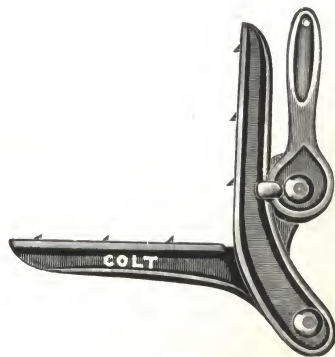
Fig. A. Aluminum Head, for holding wood strips to protect finished surfaces.
